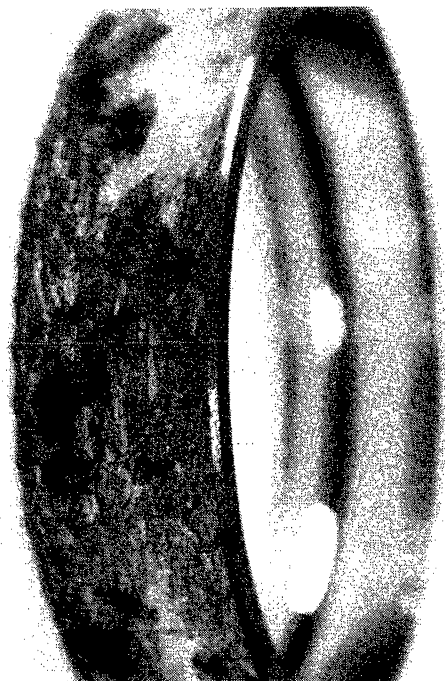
Lever arm shaft bearing from the PDM showing extensive corrosion on the outside diameter.
